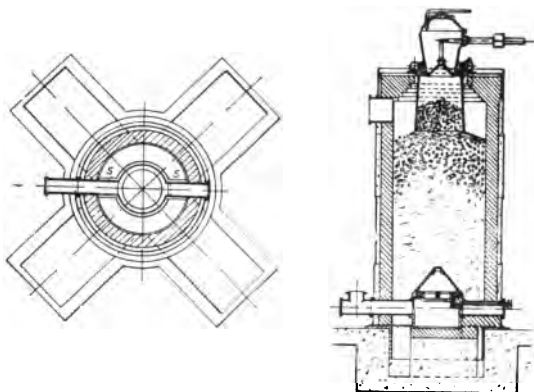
Plan and Section of the Crossley Type "B" Producer.
